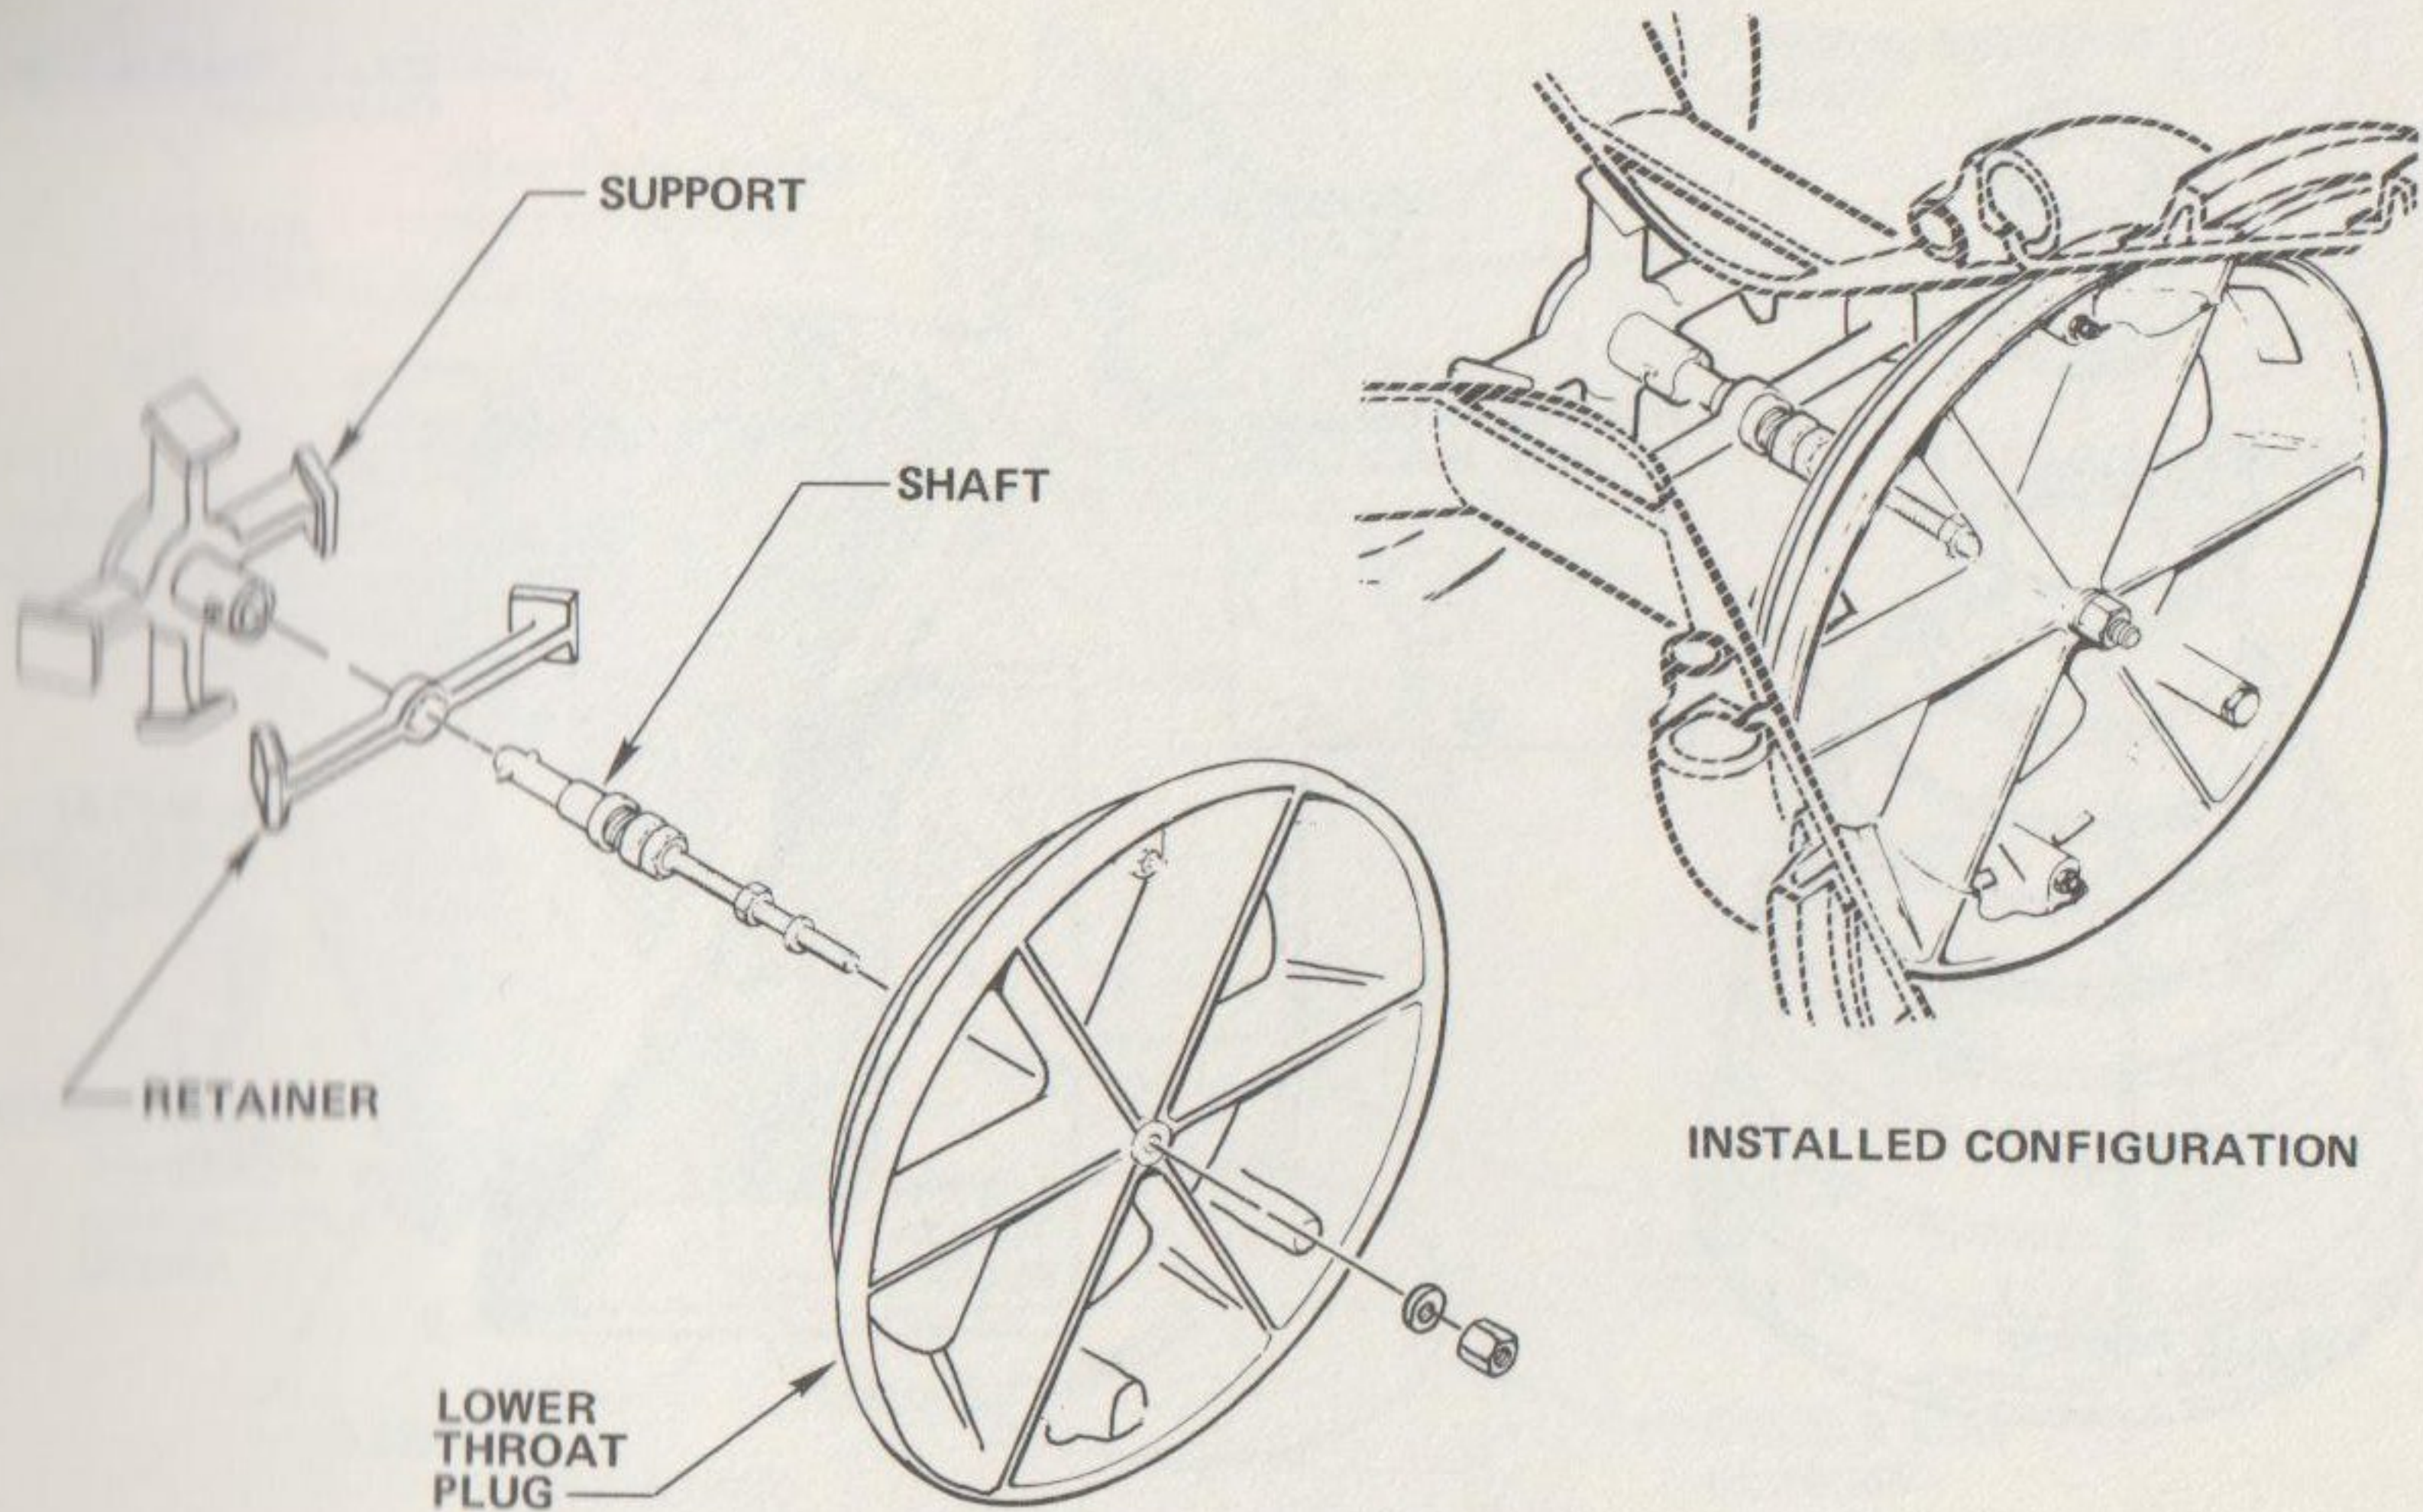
LOWER THROAT PLUG INSTALLATION
